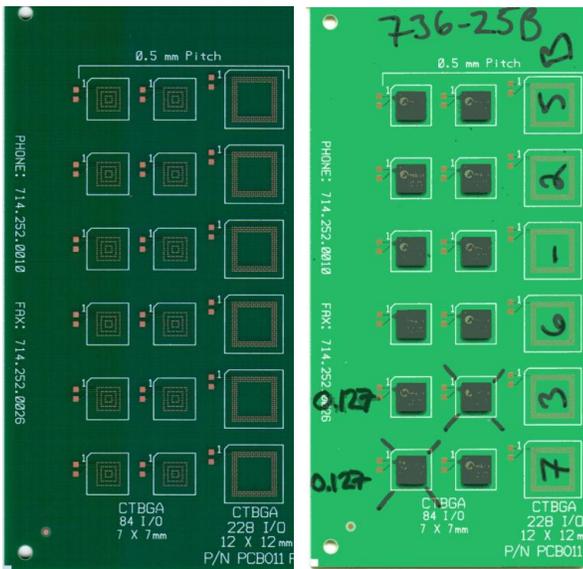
Test board used in demonstration of Epoxy Flux A before and after BGA assembly.
